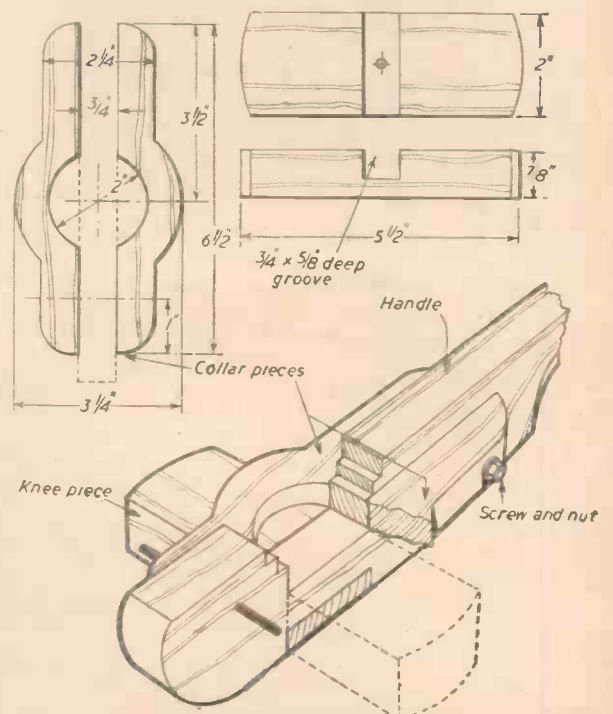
Shape and sizes of collar pieces and knee piece, with constructional detail.
